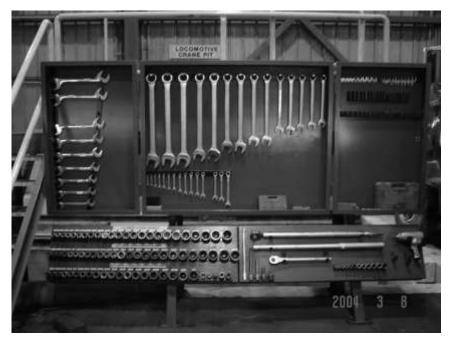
Customize your tool board and get things SET IN ORDER.
